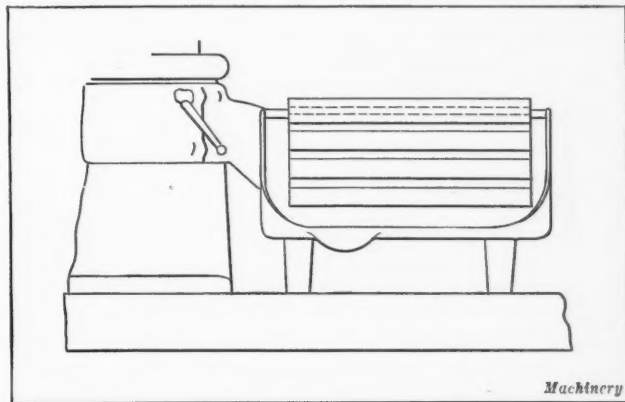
Angle Table that swings on the Column of a Drilling Machine, and has Legs extending to the Base
